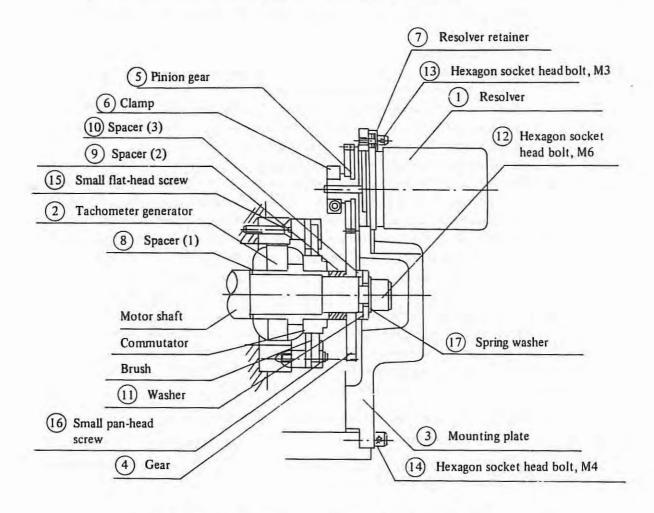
Pancake-type tachometer generator mounting diagram
